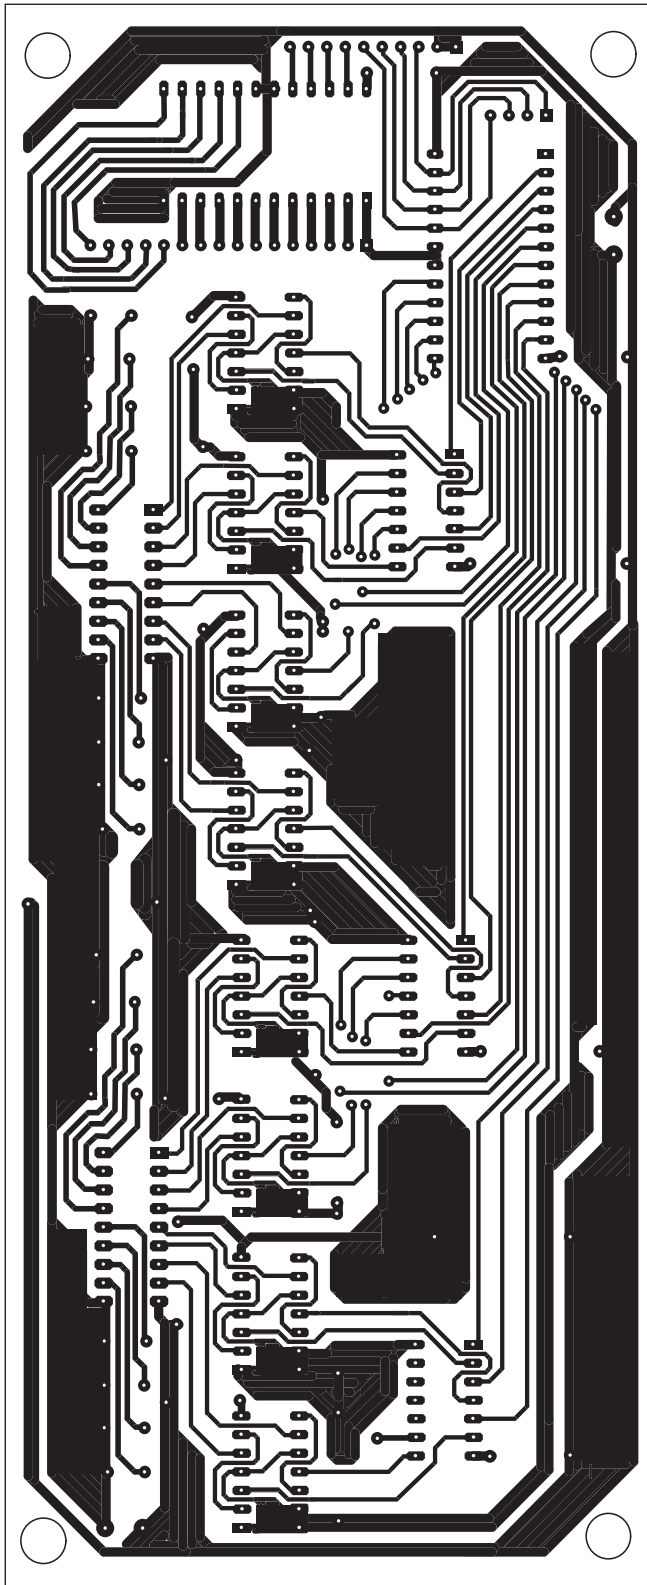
Actual-size, single-side PCB for multiple device switching using PC's parallel port
